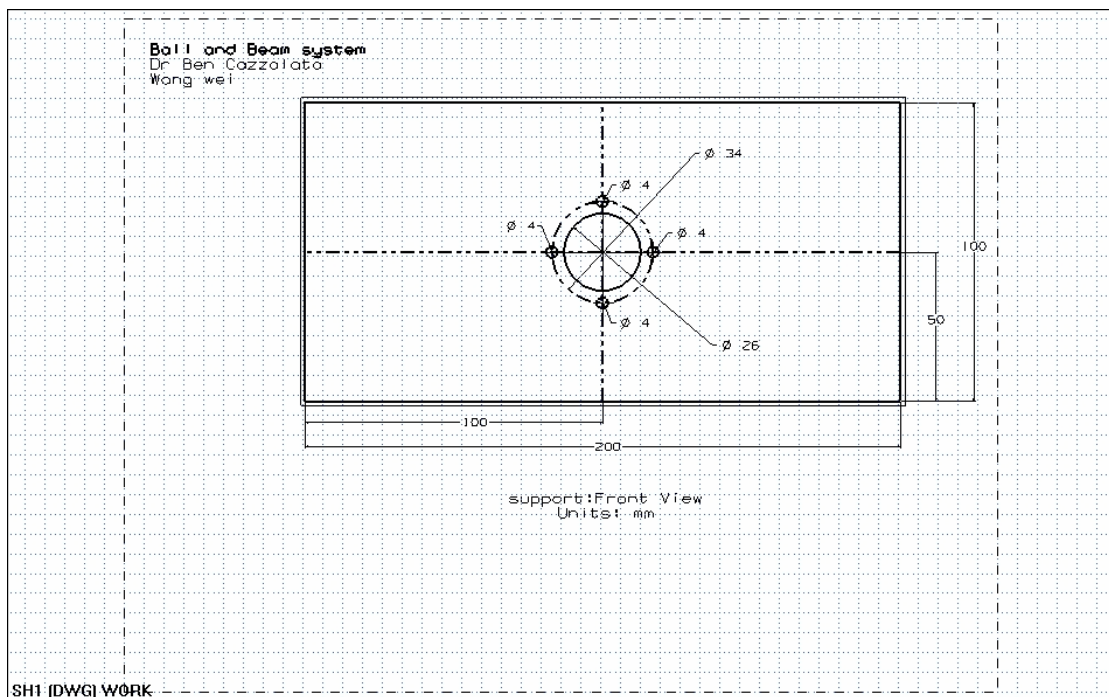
Support drawing (Front view) in (mm) (Solid Edge V19 2006)
